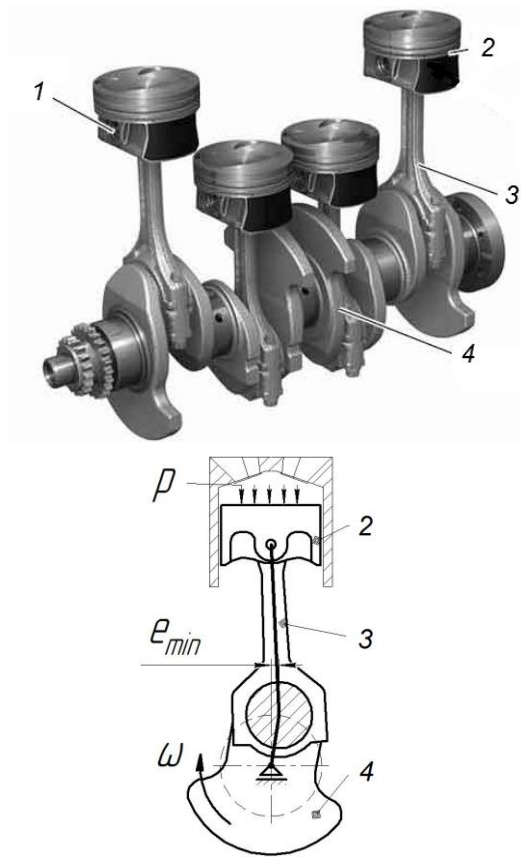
Crank mechanism: 1 – finger; 2 – piston; 3 – connecting rod; 4 – crankshaft
